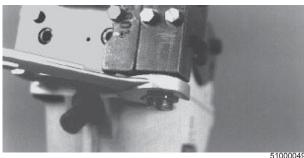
Loosen PCOR/PC Lock Nut
